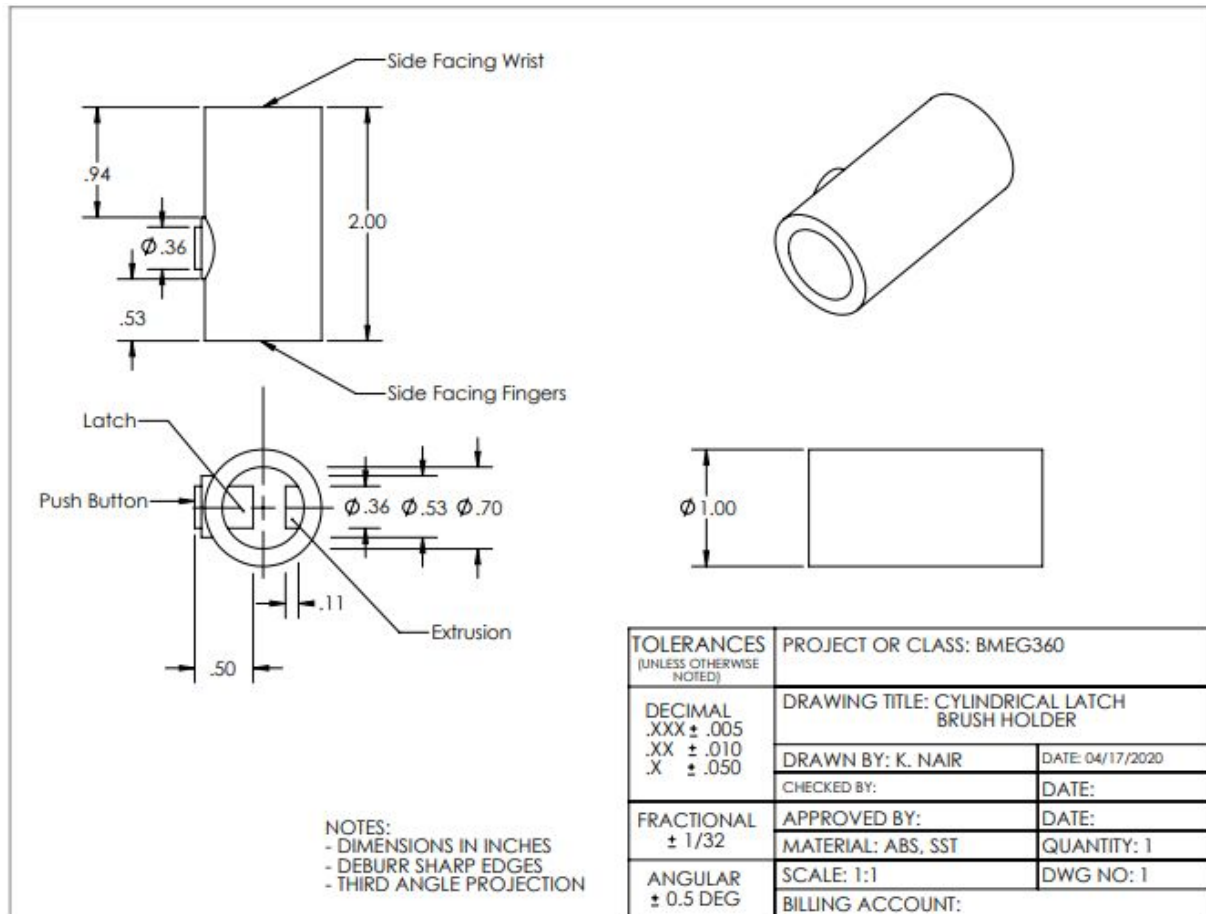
Engineering drawing of cylindrical brush holder. Brush inserts into the side facing fingers and is secured by push. Latch pushes against the brush handle and locks it against the extrusion.
